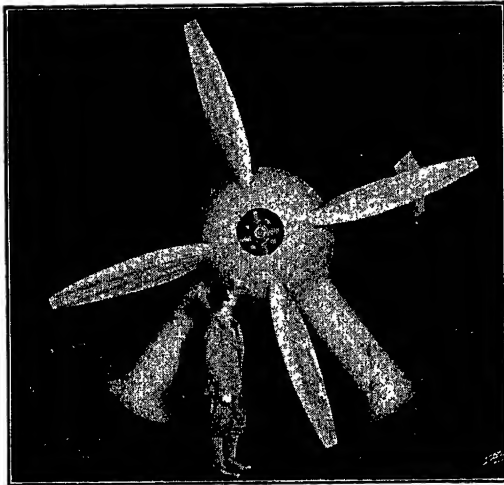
PROPELLER END OF MAIN MOTOR WITH FAIRING COMPLETED
